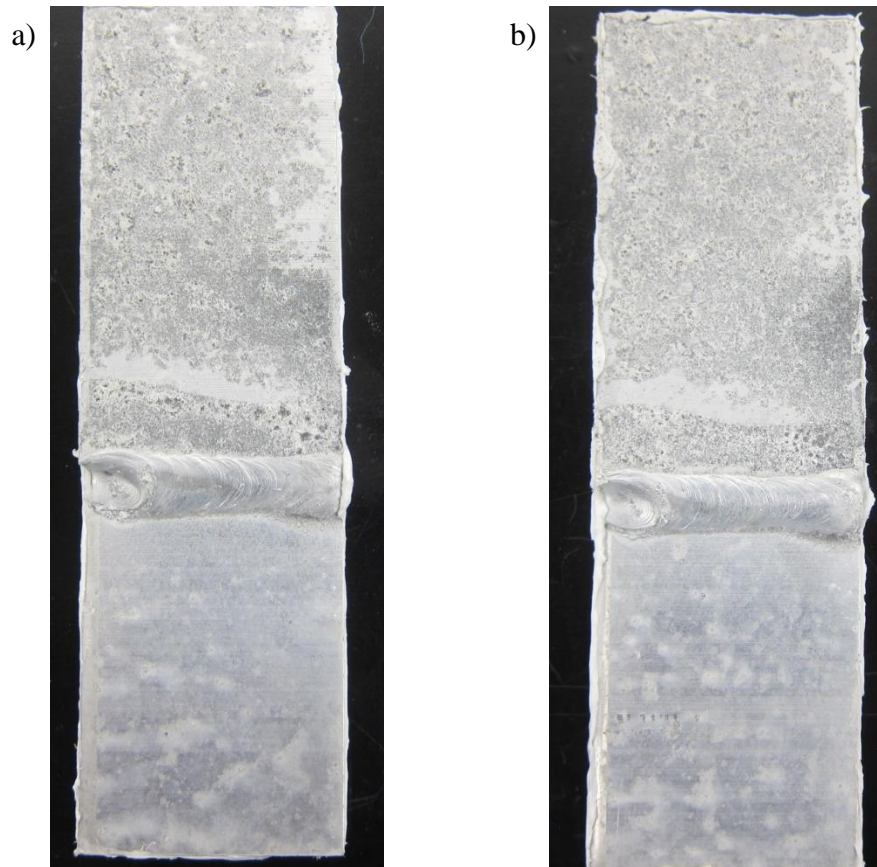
Duplicate samples of lap-joint welded configuration G3(ER5356/AA7003/=) in the as-welded T6+PB condition.
